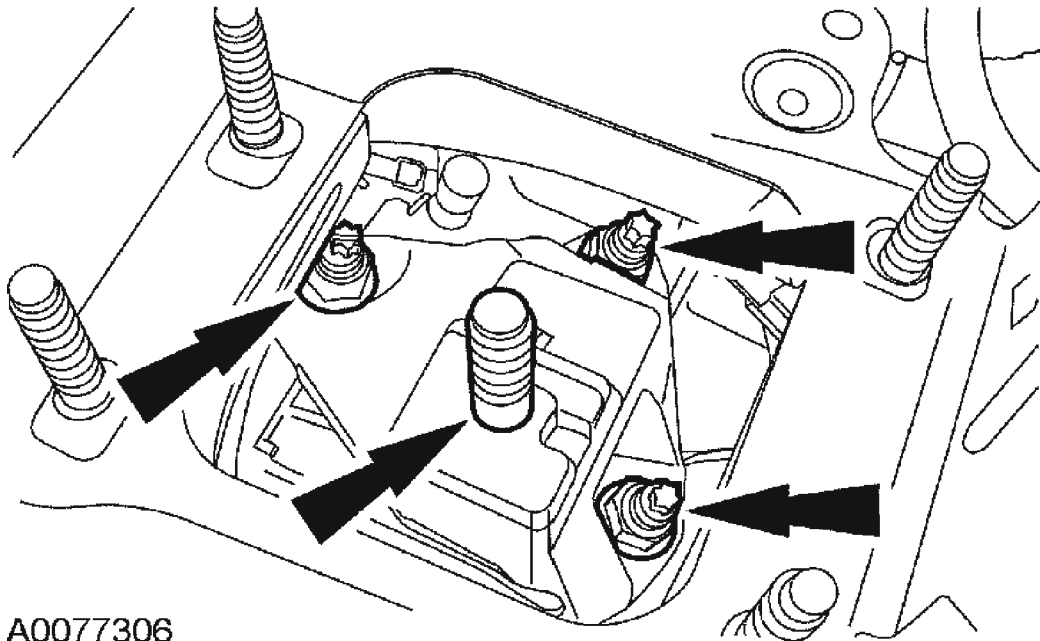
Removing Engine Rear Mount Bracket Nuts
